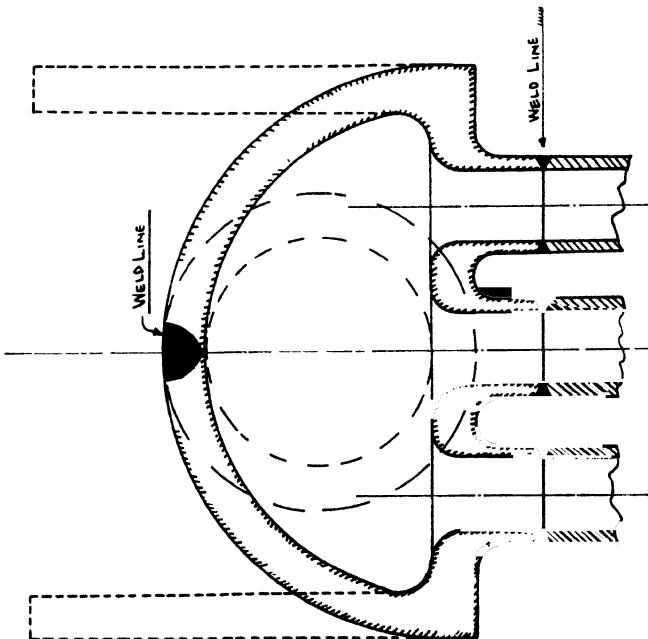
Cross section of water wall element adapted to superheater header construction.
